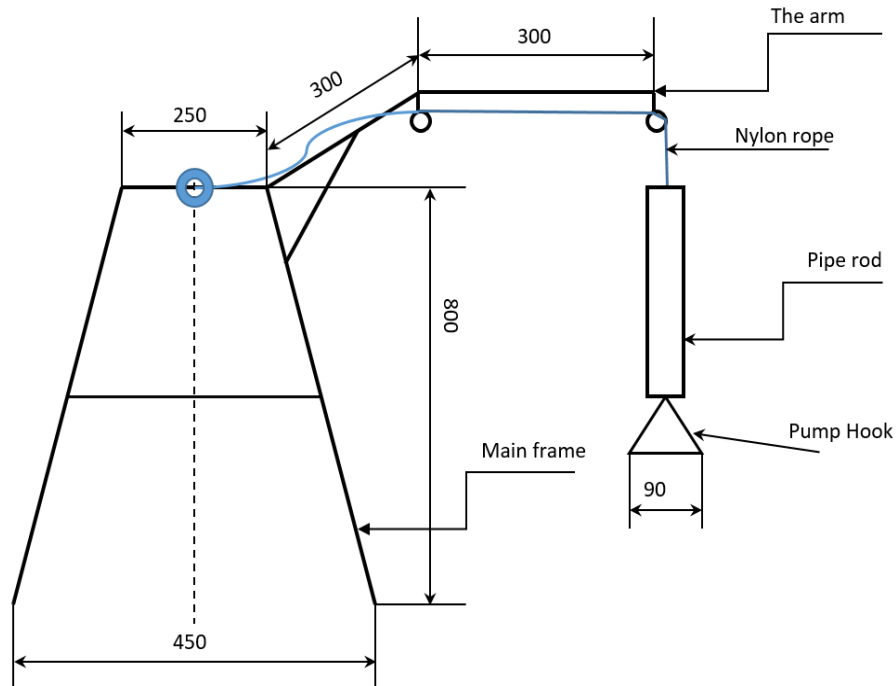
2 full drawing of a tool to remove drawn submersible pumps
